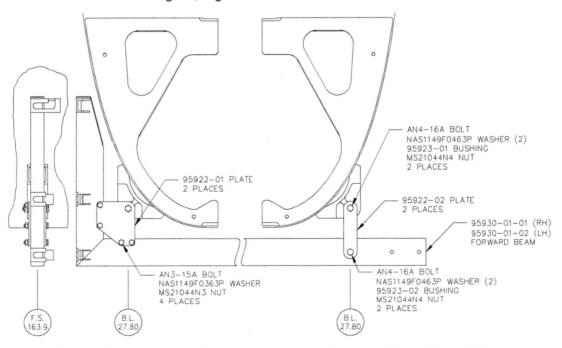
Forward Beam Removal / Installation – S/N 57001 - 57080 Looking Aft, Right Hand Installation Shown
